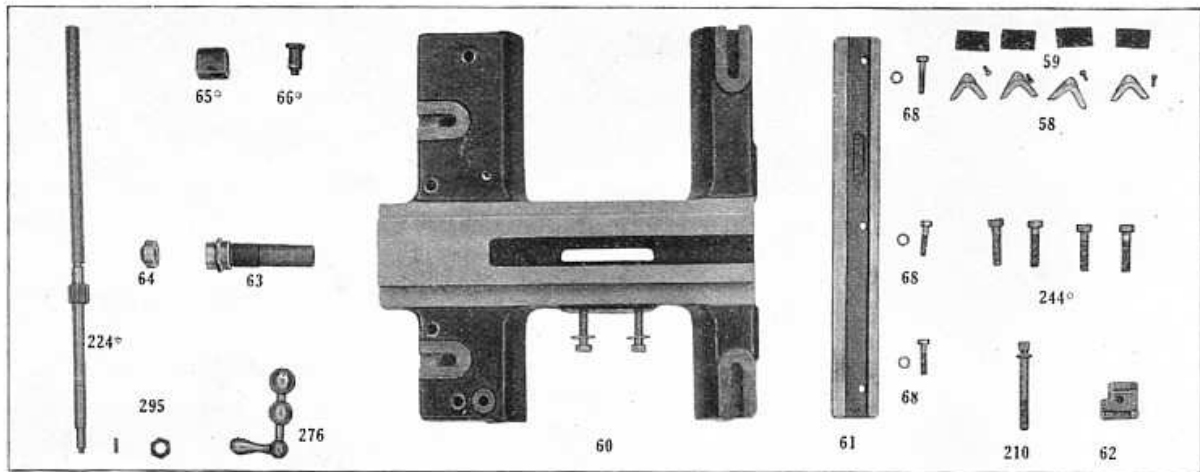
Saddle Parts for South Bend Lathes. See next page for Prices.
